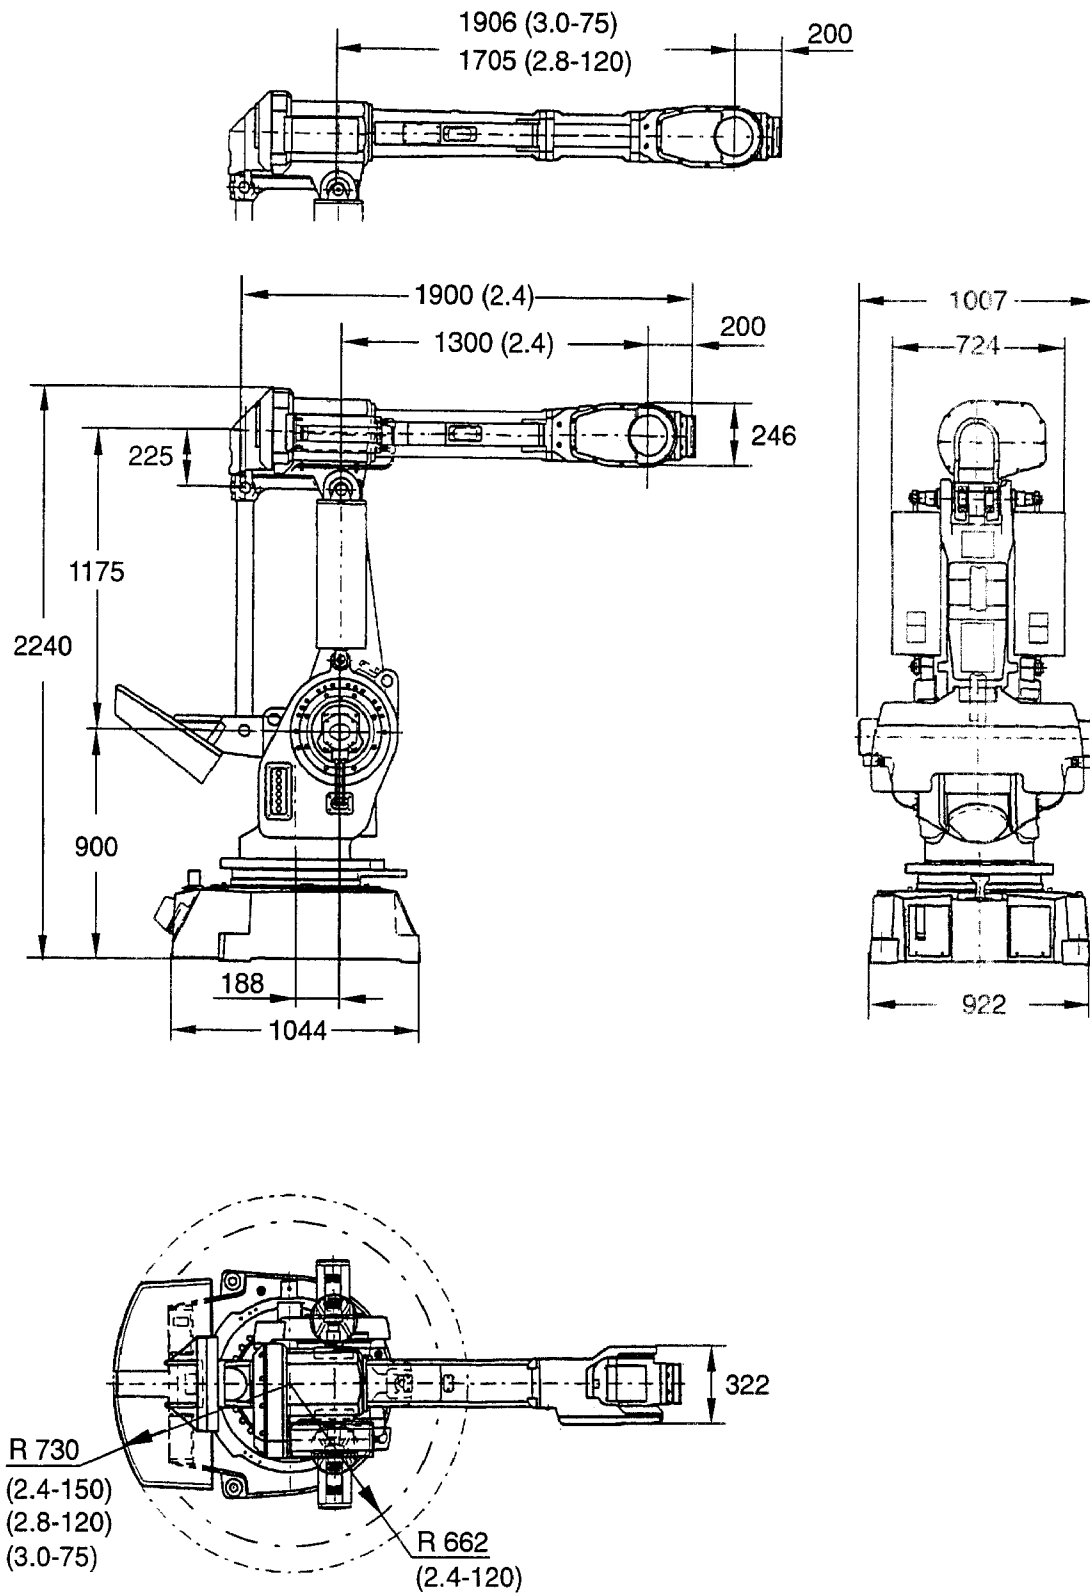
View of the manipulator from the side, rear and above (dimensions in mm).
